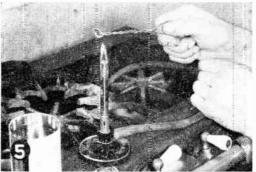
Hardening cutting blades in a Bunsen burner (see text).
